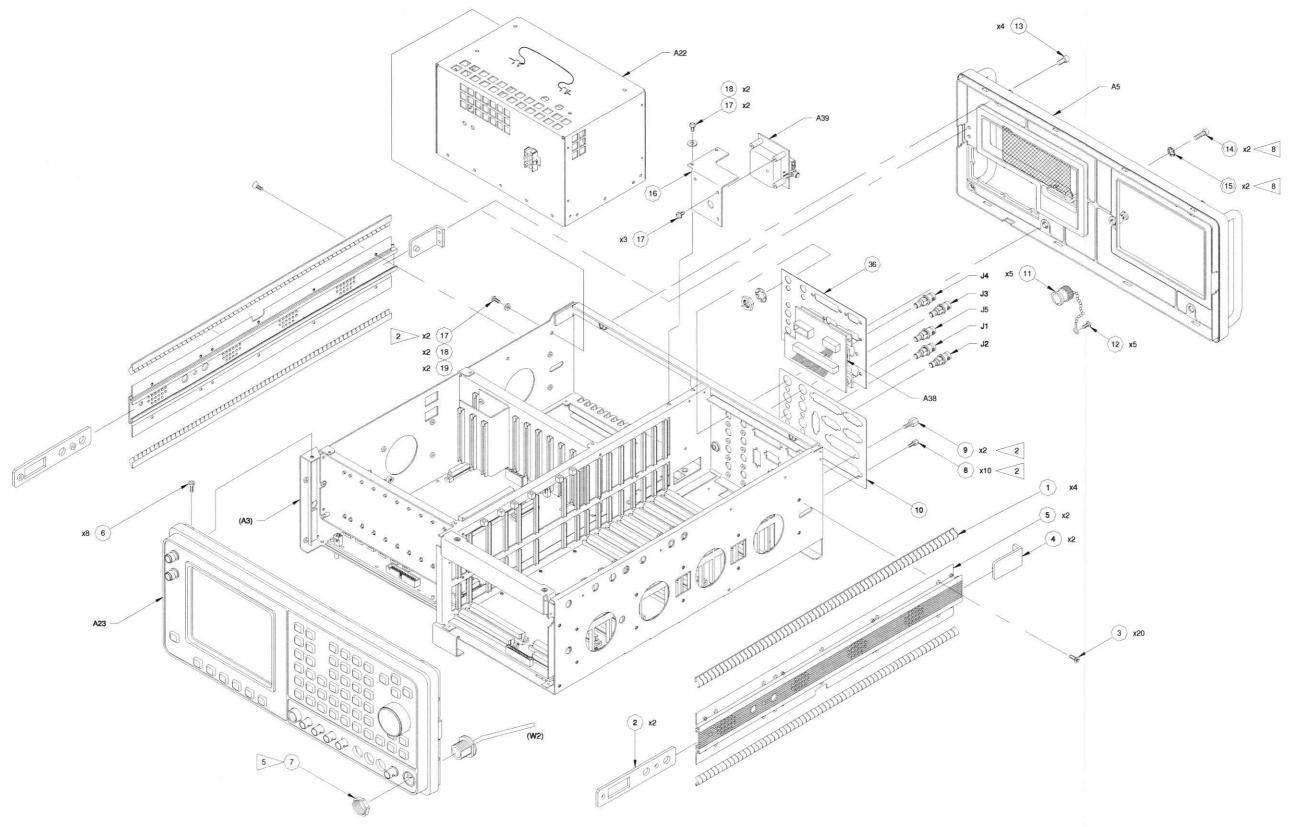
Test Set (34A5) Assembly, Cable Locator and Interconnect Diagram (Sheet 5 of 7)
